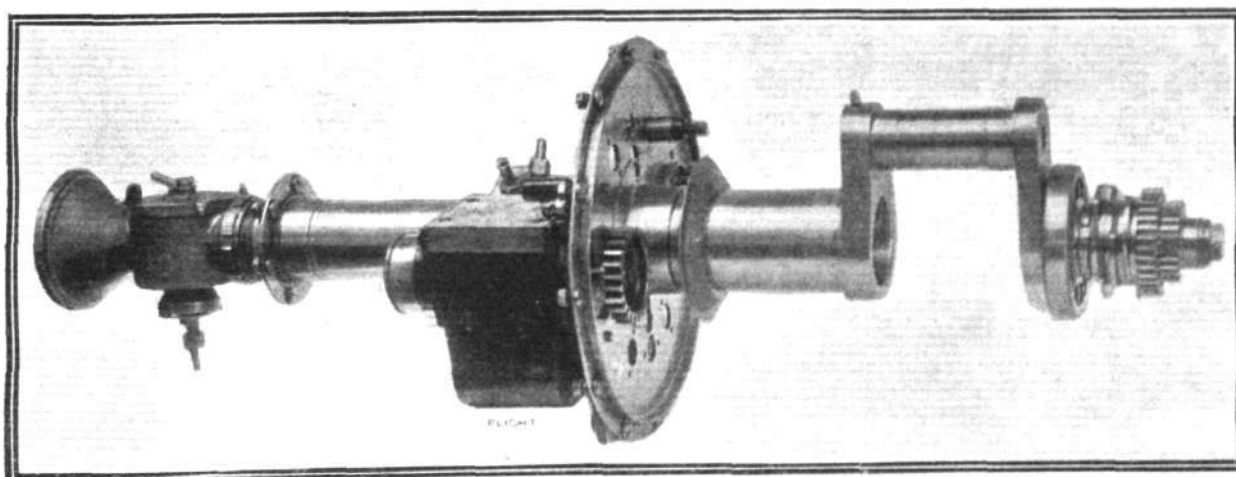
The 80 h.p. Daimler-Gnome Engine.—A view of the complete stationary crankshaft, with the rear end plate upon which the oil pump, magneto and distributor brush are seen mounted.
